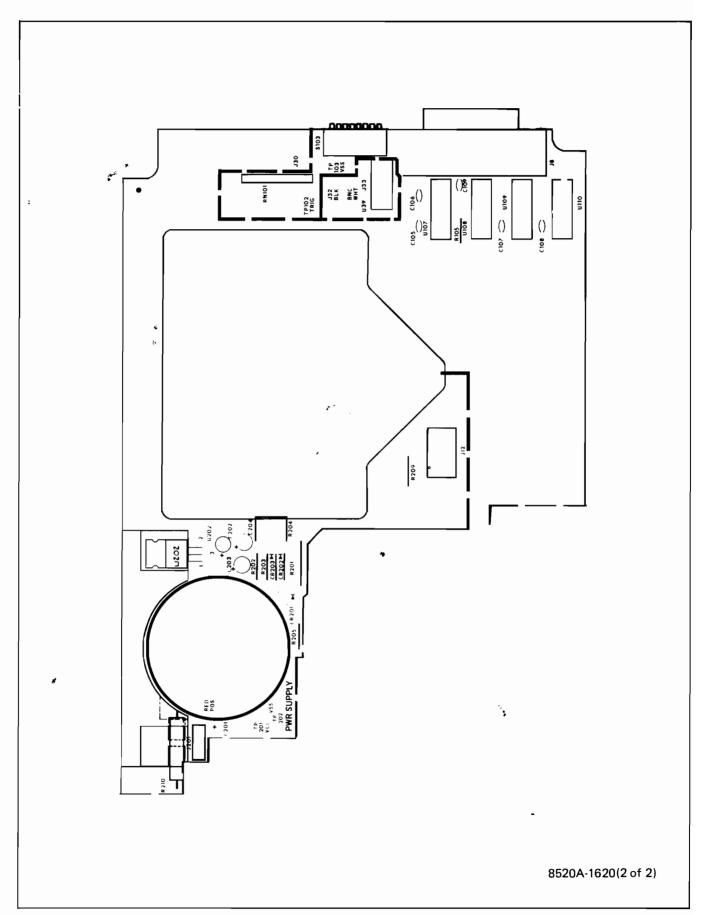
A2 Digital (Controller) PCB Assembly (cont)
